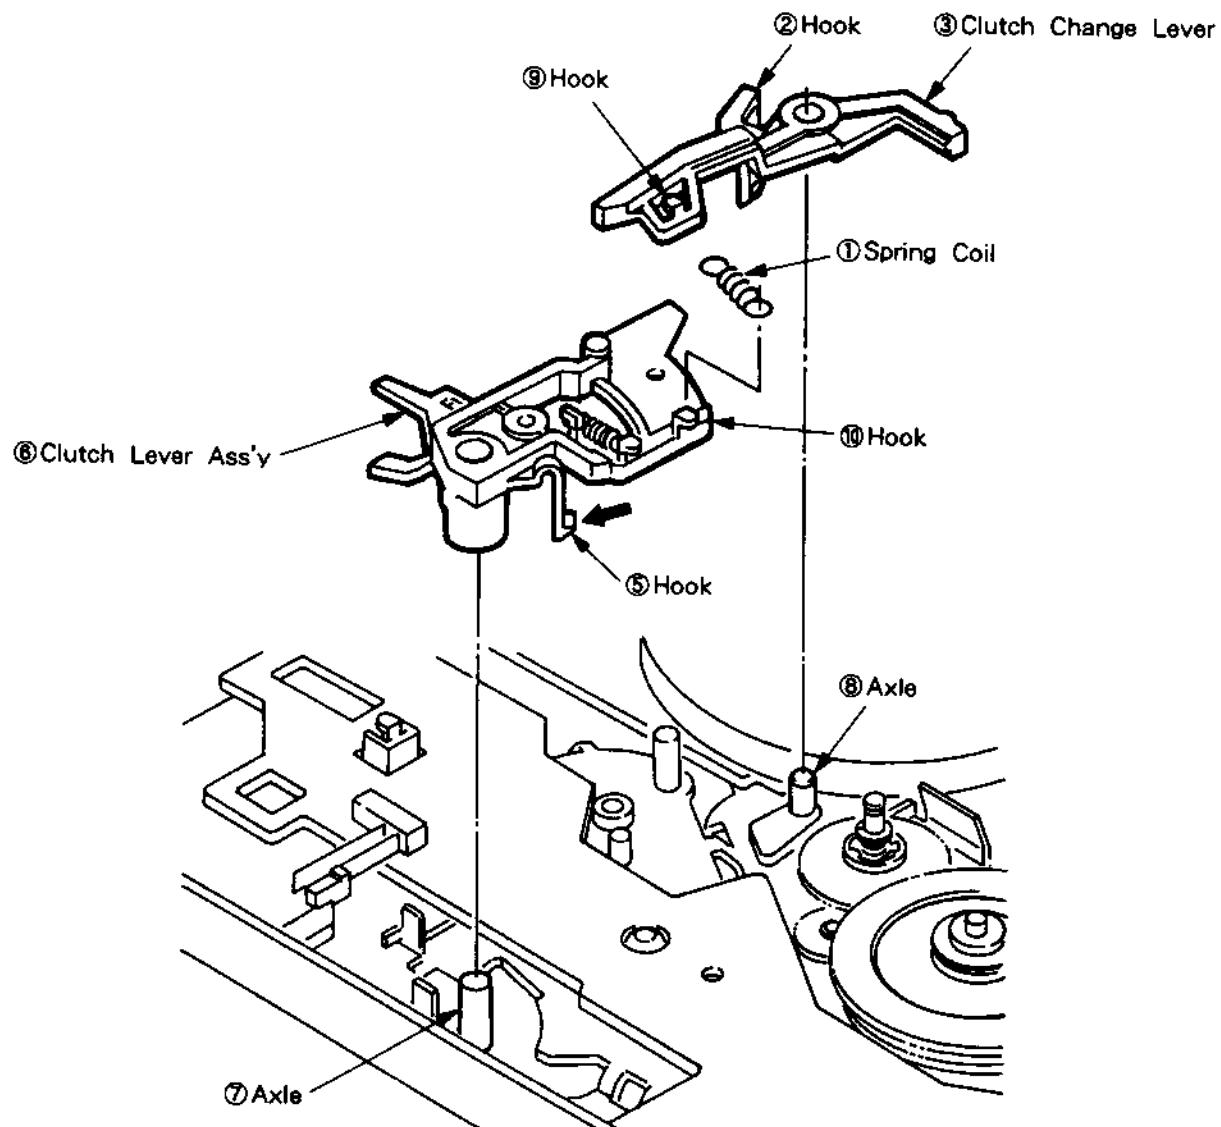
Clutch Change Lever & Clutch Lever Ass'y
